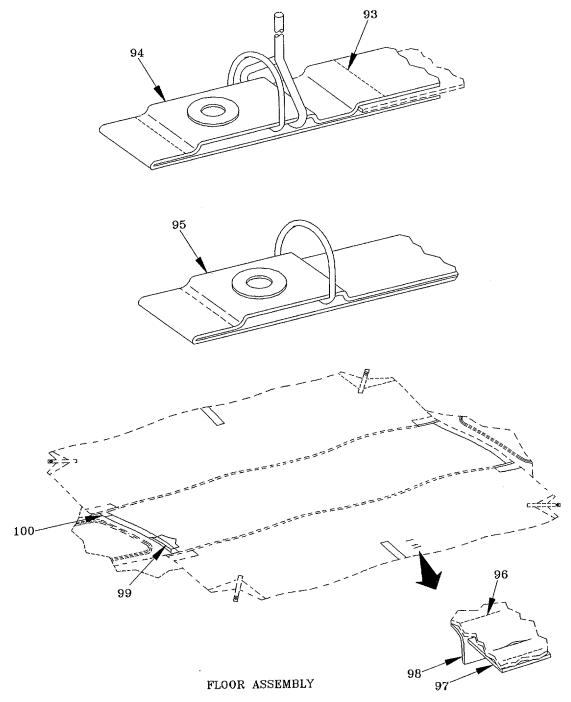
TENT BODY ASSEMBLY (Sheet 9 of 10)
